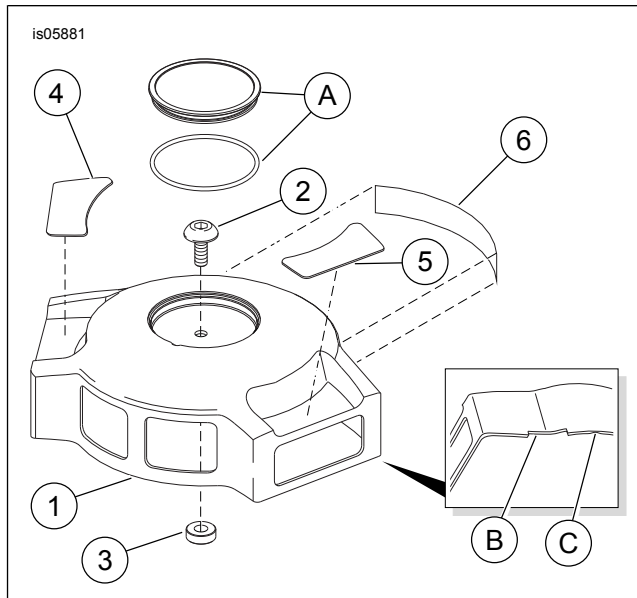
Service Parts: Billet Air Cleaner Cover Kit
